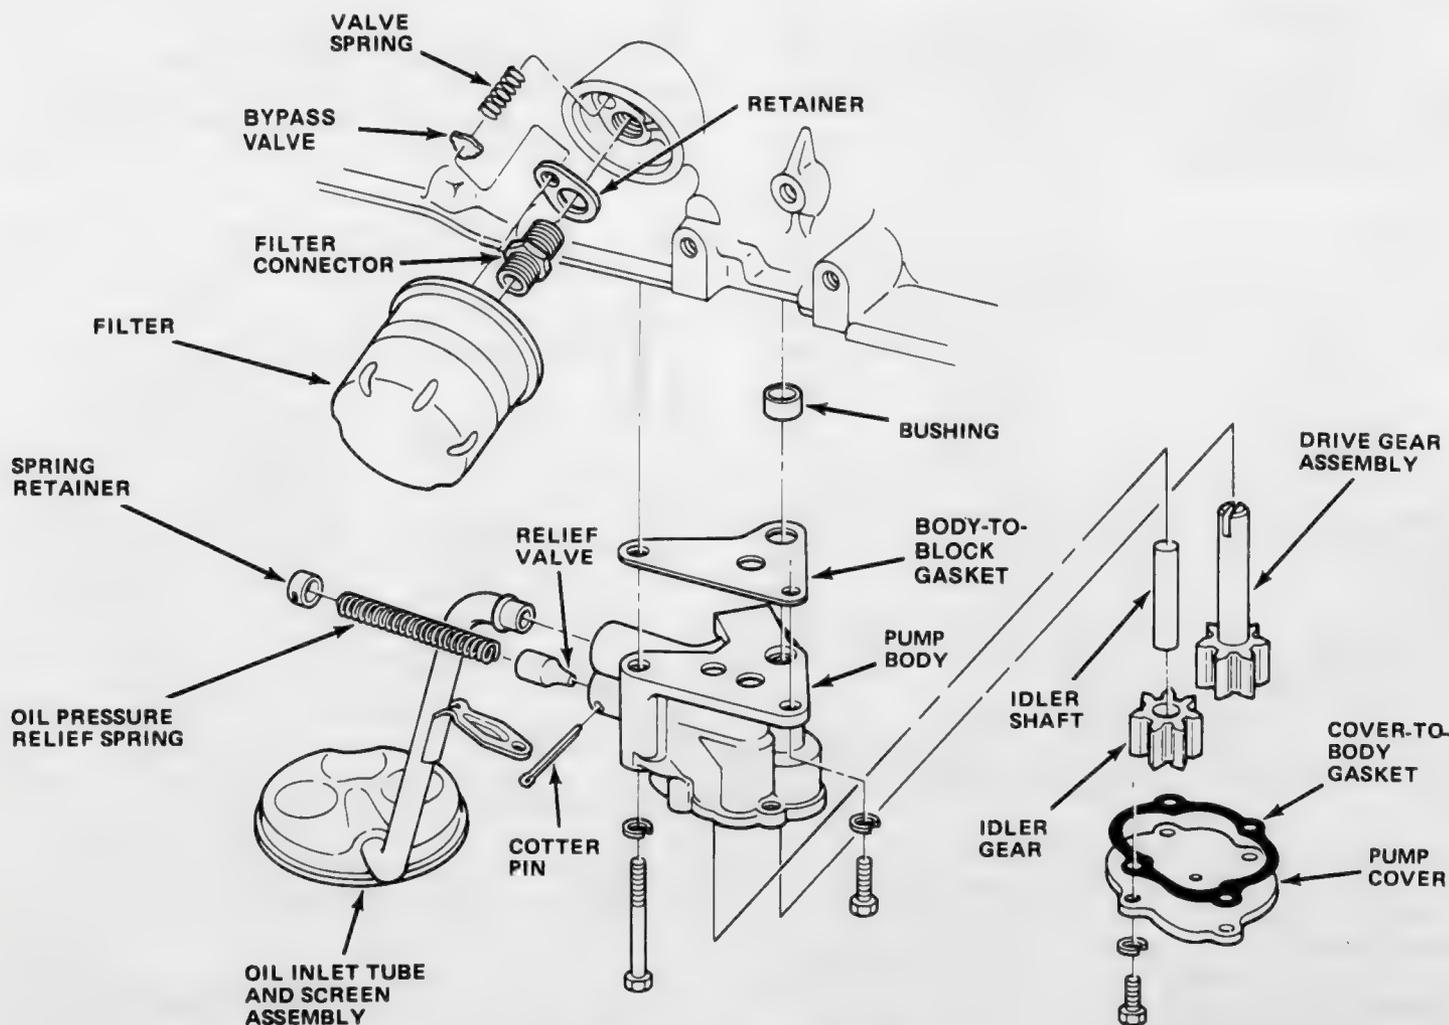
B-94 Oil Filter and Oil Pump Assembly
